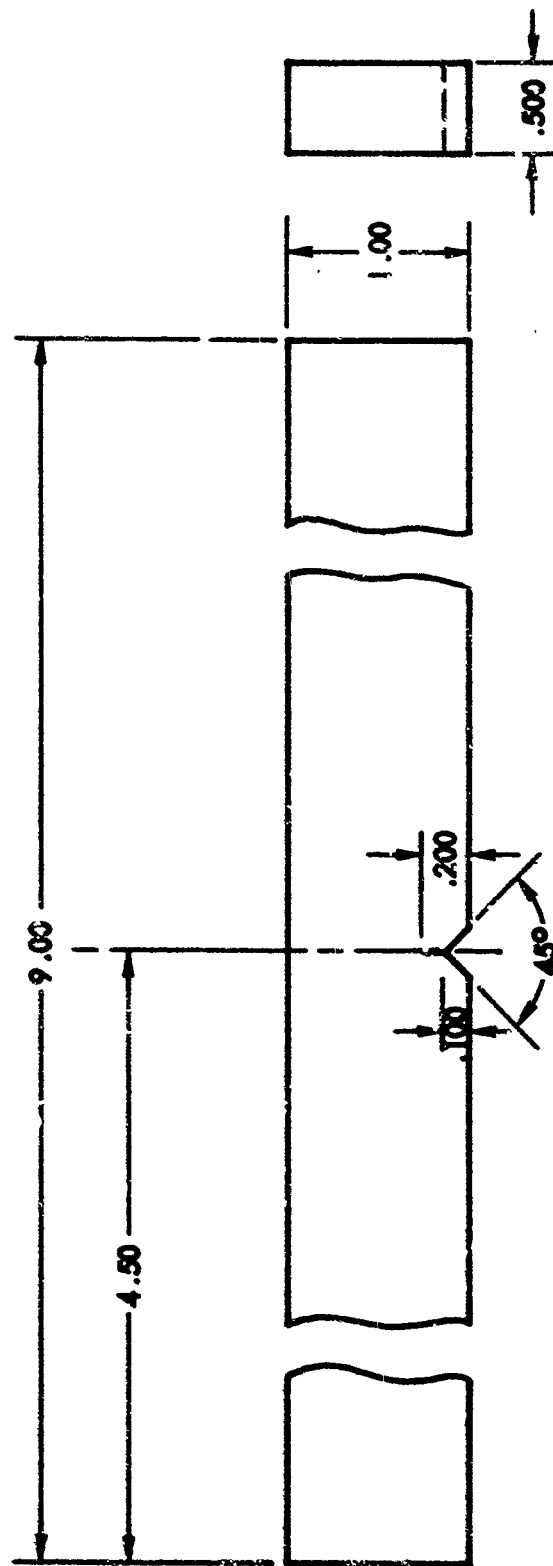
Fatigue Cracked Bend Specimen, Thick Extrusion
